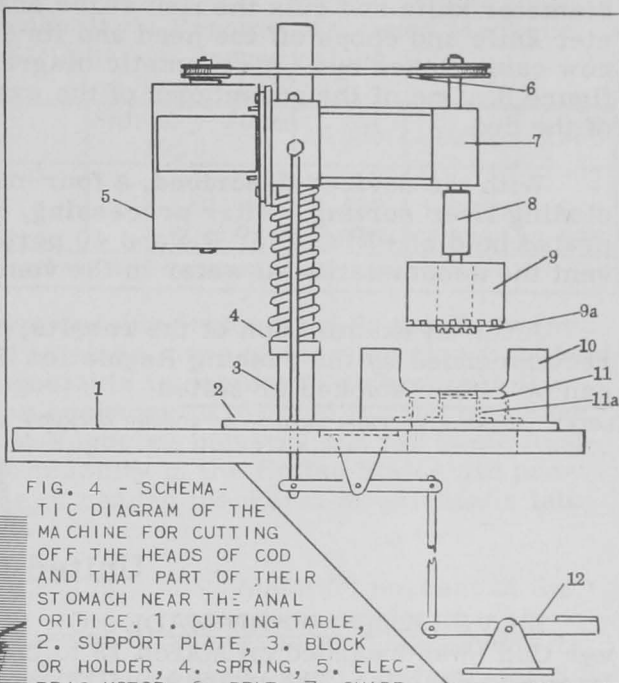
SCHEMATIC DIAGRAM OF THE MACHINE FOR CUTTING OFF THE HEADS OF COD AND THAT PART OF THEIR STOMACH NEAR THE ANAL ORIFICE. 1. CUTTING TABLE, 2. SUPPORT PLATE, 3. BLOCK OR HOLDER, 4. SPRING, 5. ELECTRIC MOTOR, 6. BELT, 7. GUIDE, 8. SHAFT, 9 & 9A. REMOVABLE CIRCULAR KNIVES FOR CUTTING THE HEAD OR STOMACH AROUND THE ANAL ORIFICE, 10. SUPPORT PLATE FOR FISH, 11 & 11A. FIXED KNIVES, 12. PEDAL.
